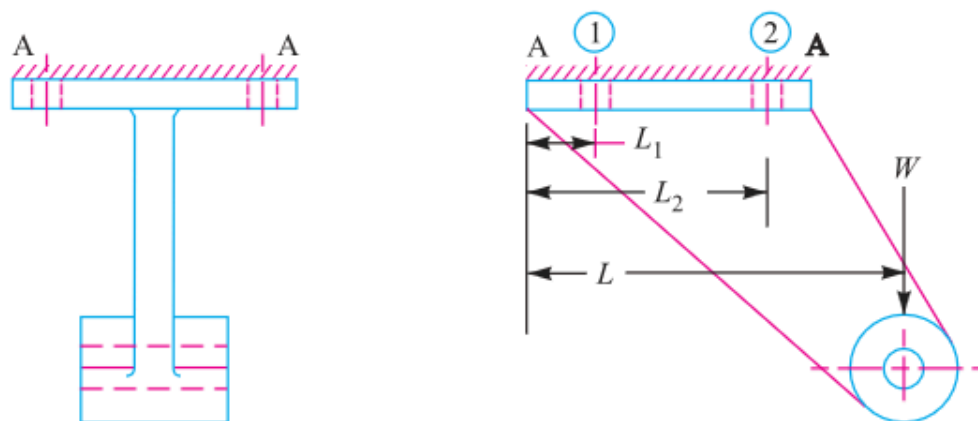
Eccentric load acting parallel to the axis of bolts.
